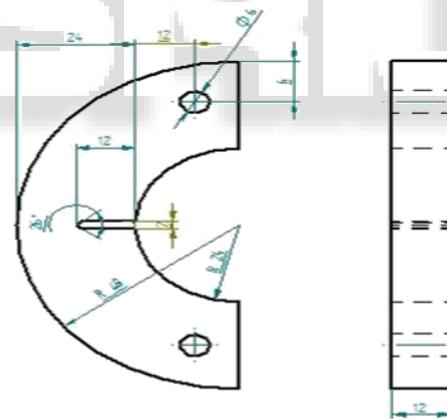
Dimensional Drawing of 12 mm thick AT Specimen
